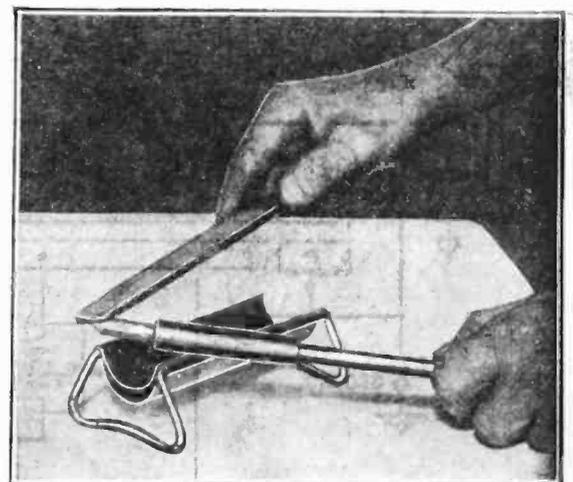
Be sure your iron is clean before attempting to solder with it. A file will scrape the dirt off.
